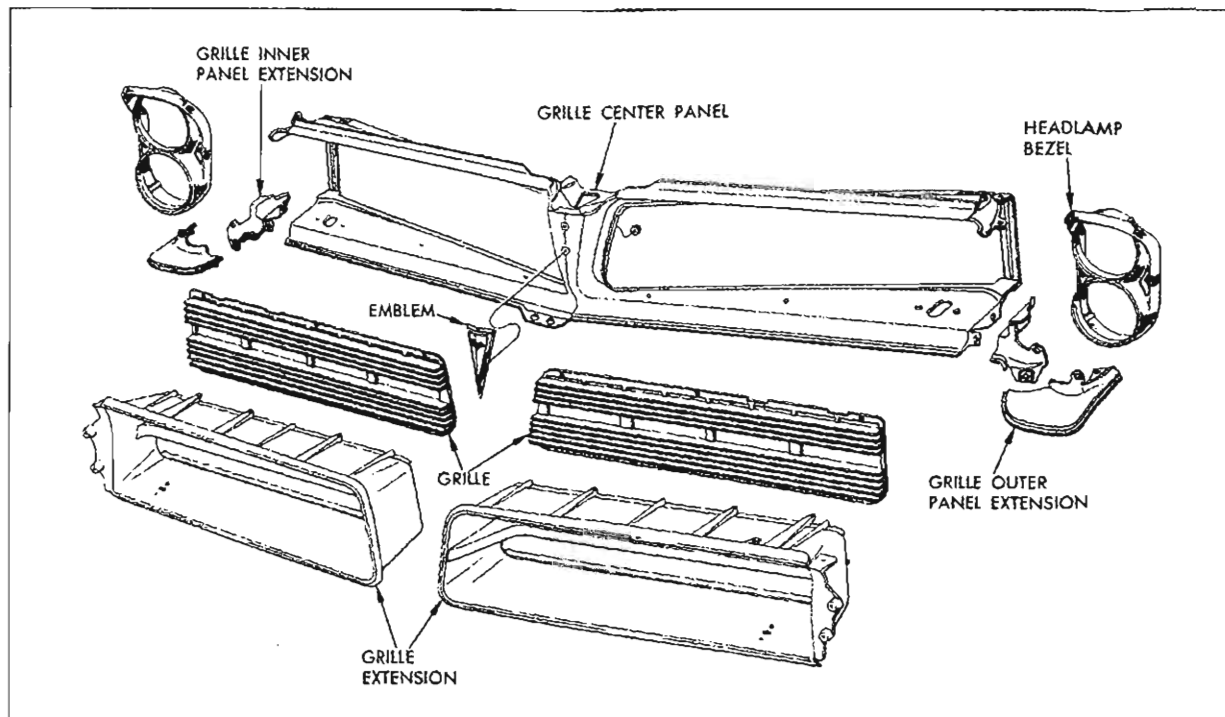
Details of Radiator Grille Assembly—Grand Prix
